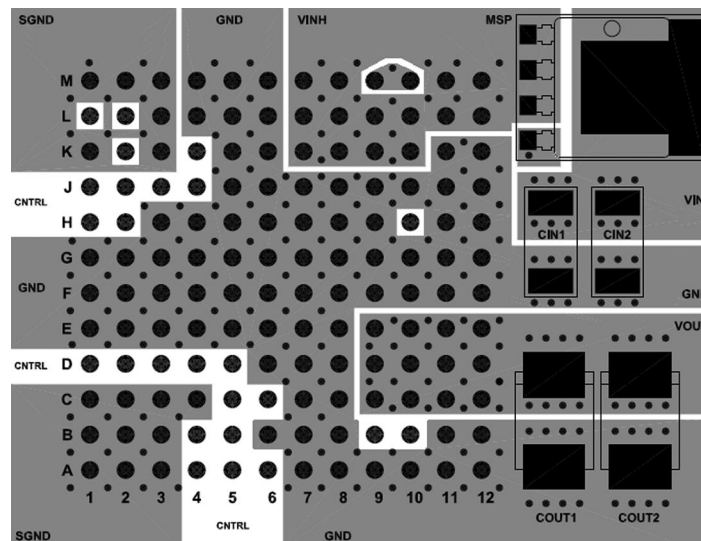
Recommended PCB Layout, Figure 46 Circuit. View of the LTM4641 from Top of Package
